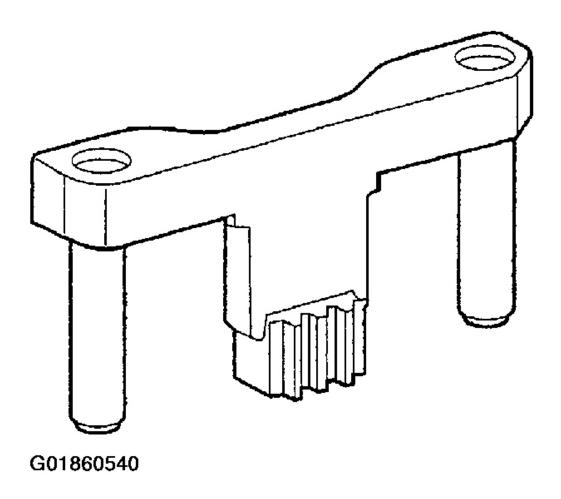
Identifying Flywheel Locking Tool 9102 Courtesy of DAIMLERCHRYSLER CORP.
